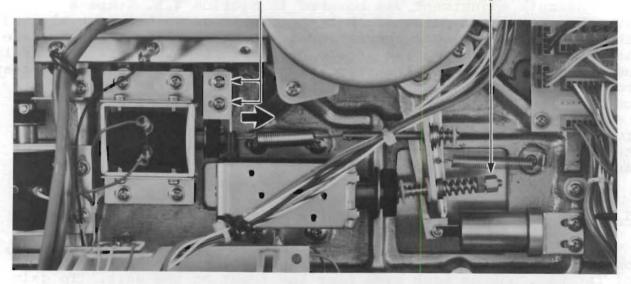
PINCH ROLLER SOLENOIDS & ADJUSTING POINTS
